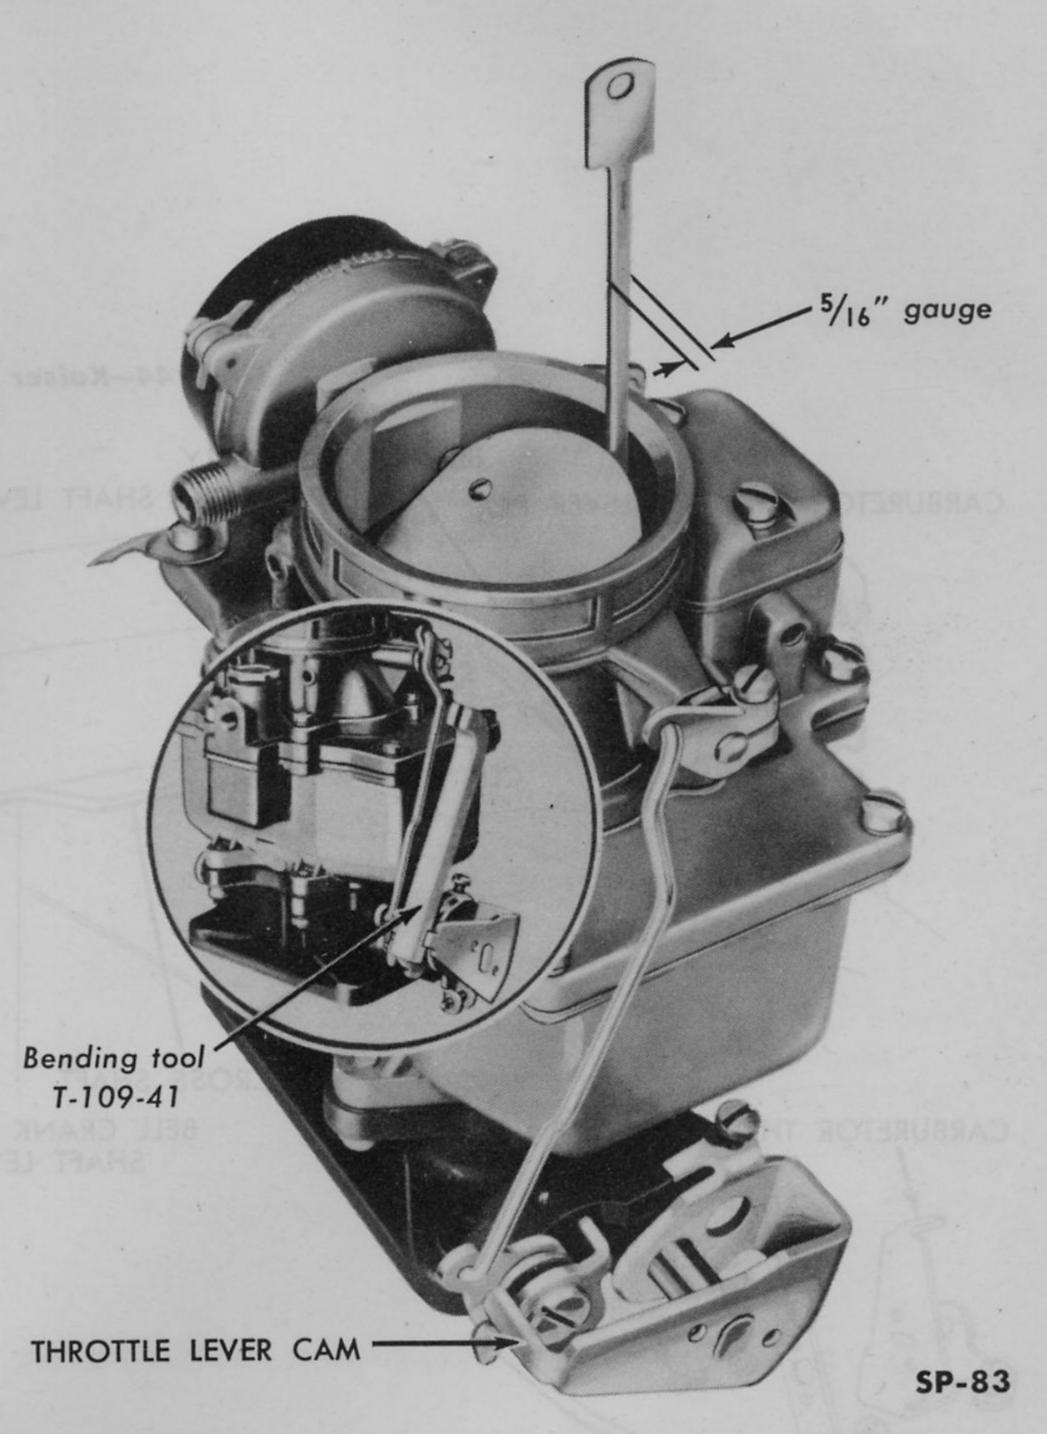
Adjusting Unloader Lip (WCD-7235)
